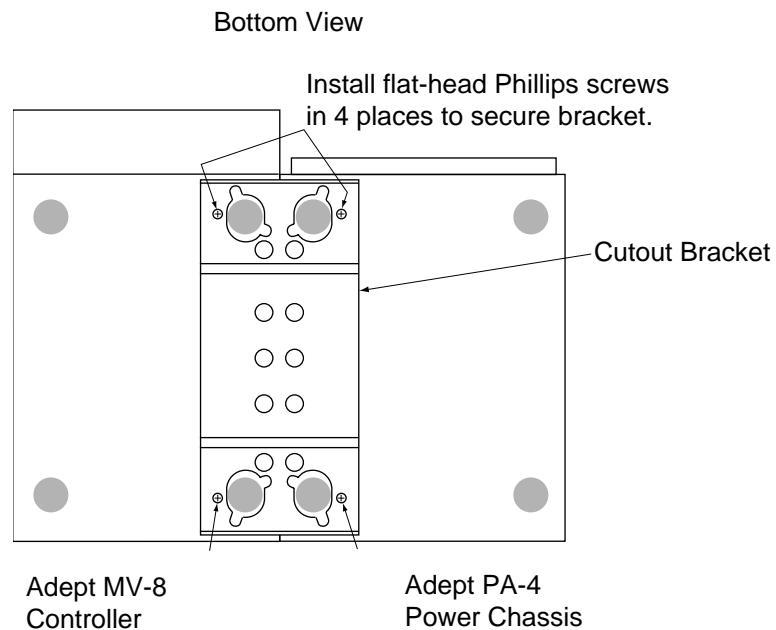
Joining the Power Chassis and Controller at the Bottom
